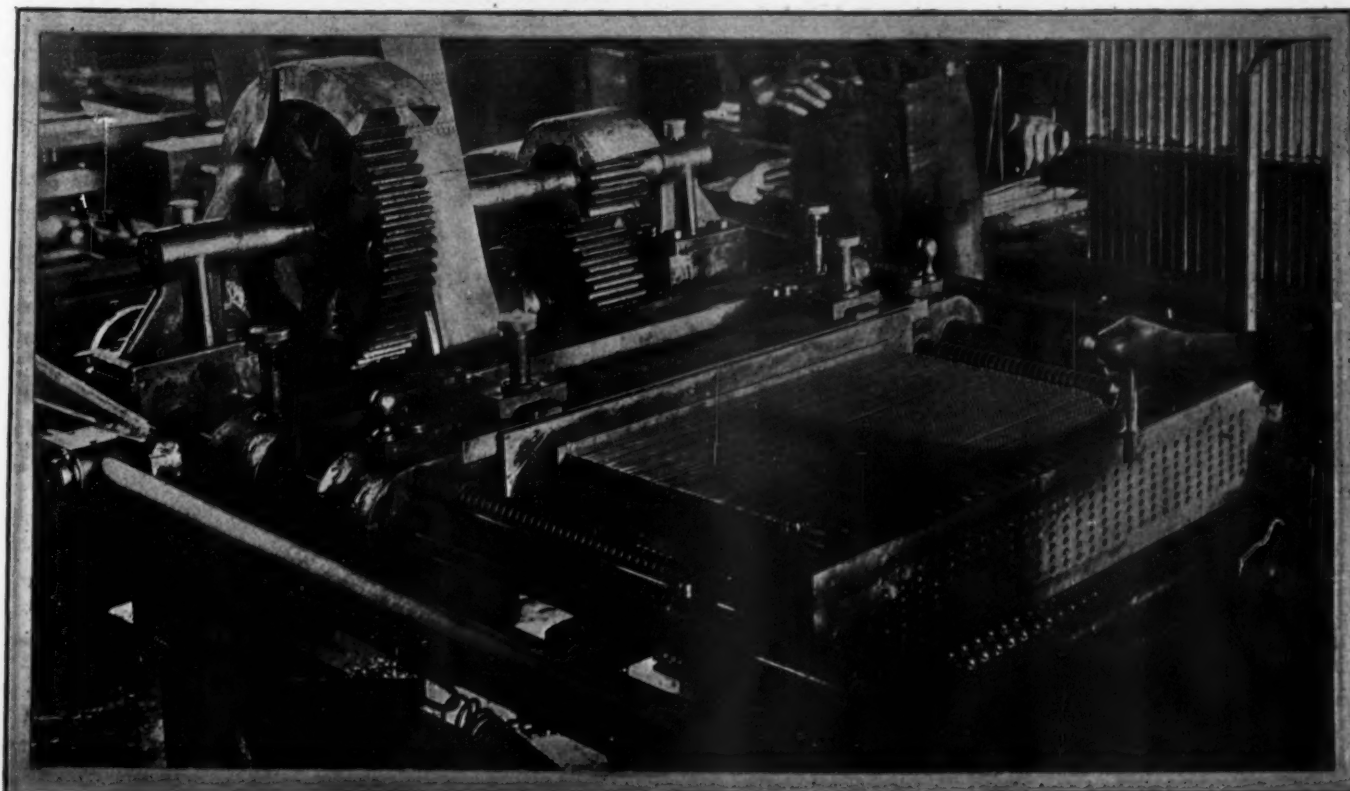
Process and press, used to assemble McCord radiators, showing gill-plates being pressed on
